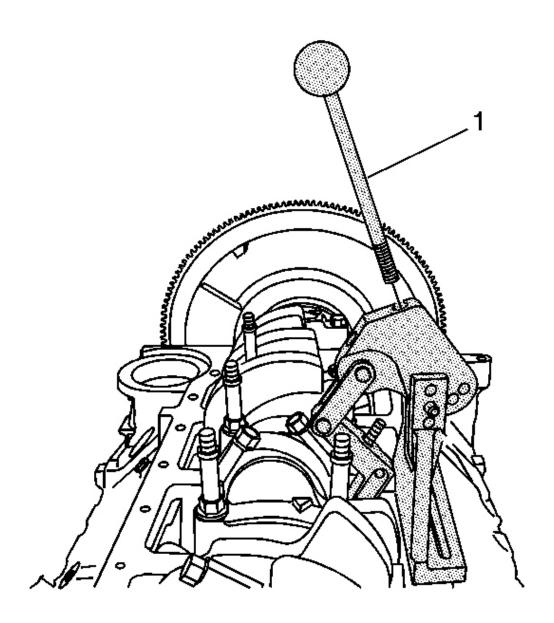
Pivot Arm Assembly Handle Courtesy of GENERAL MOTORS CORP.
